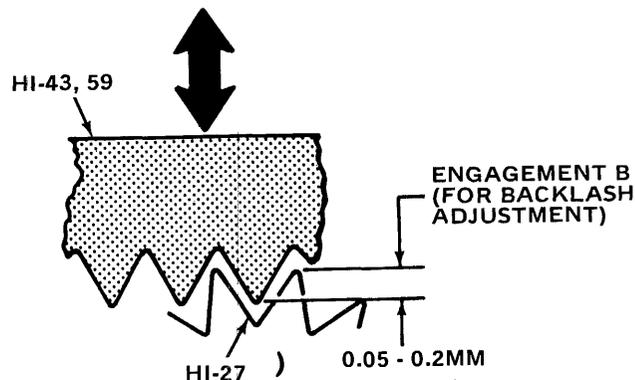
BACKLASH ADJUSTMENT, BEVEL GEAR (HI-43, 59)
